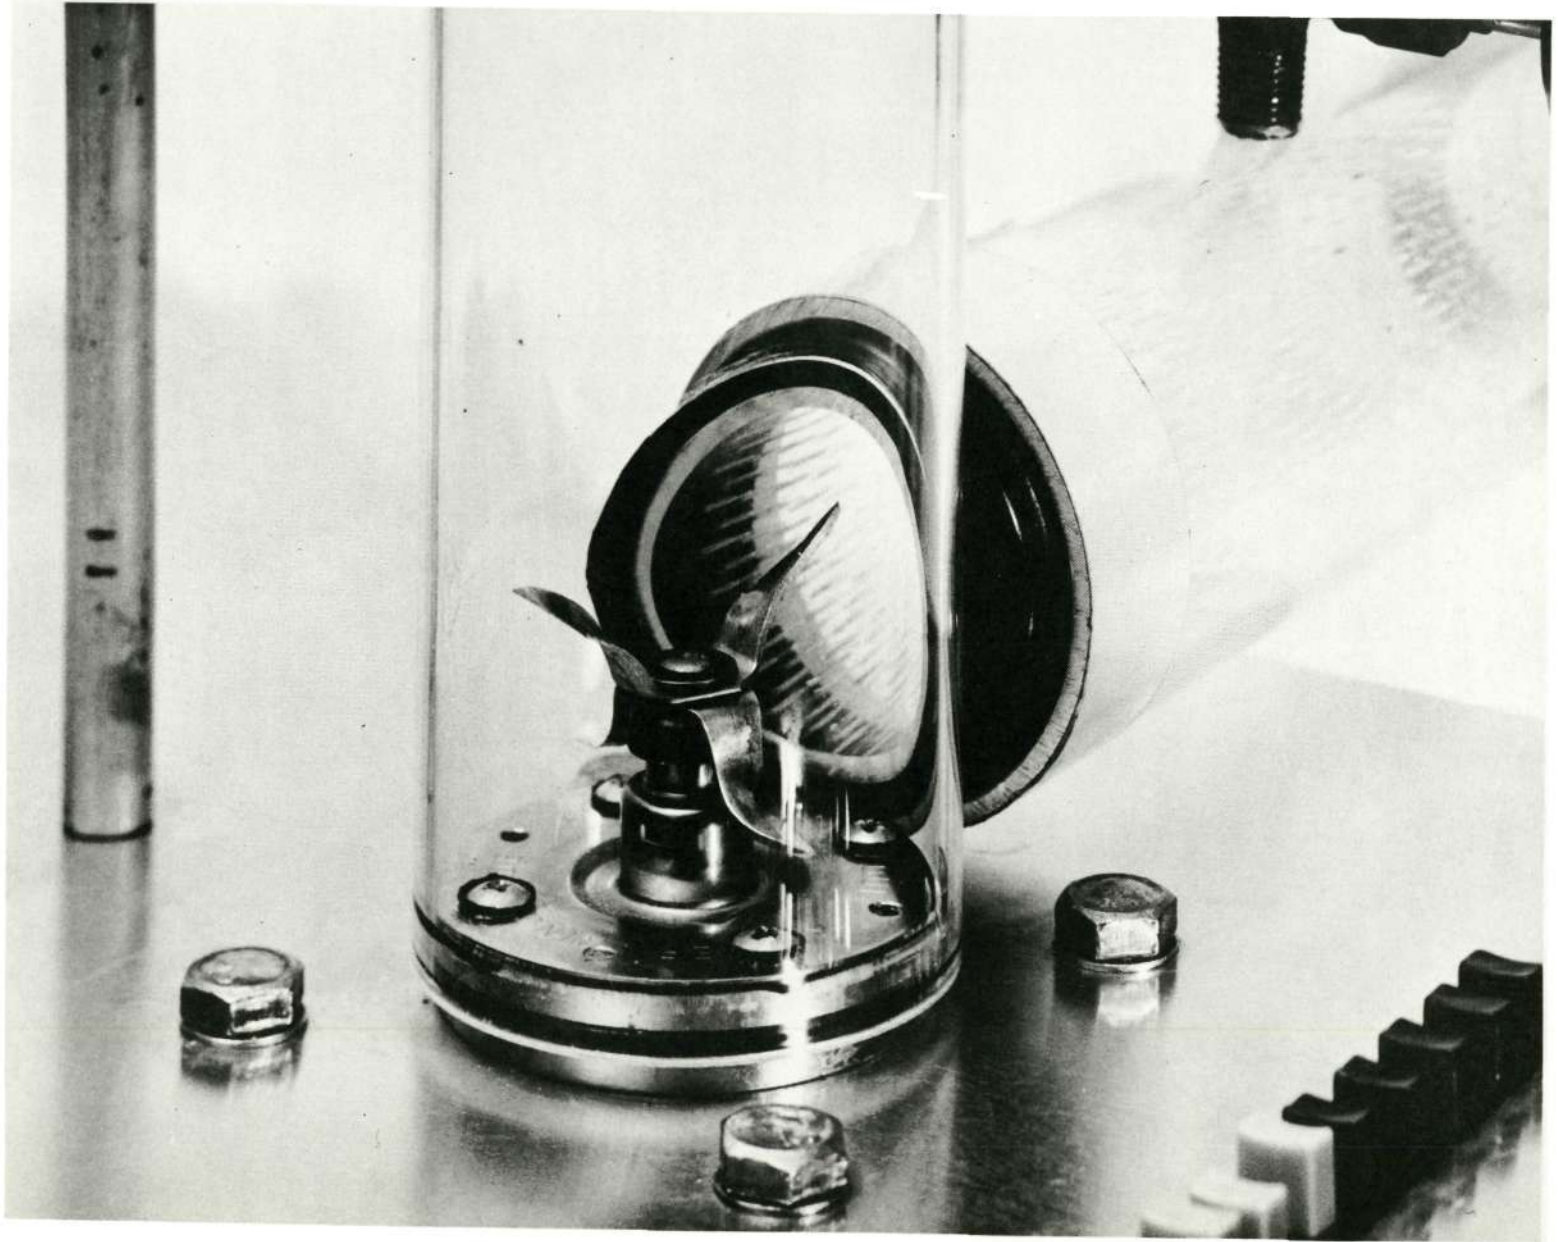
CLOSE-UP VIEW OF CHOPPER-BLADE ASSEMBLY
